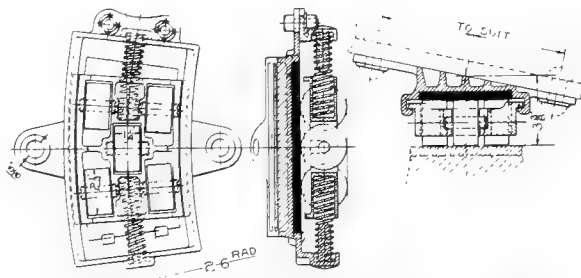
Drexel Five-Roller Side Bearing for Freight Service.
